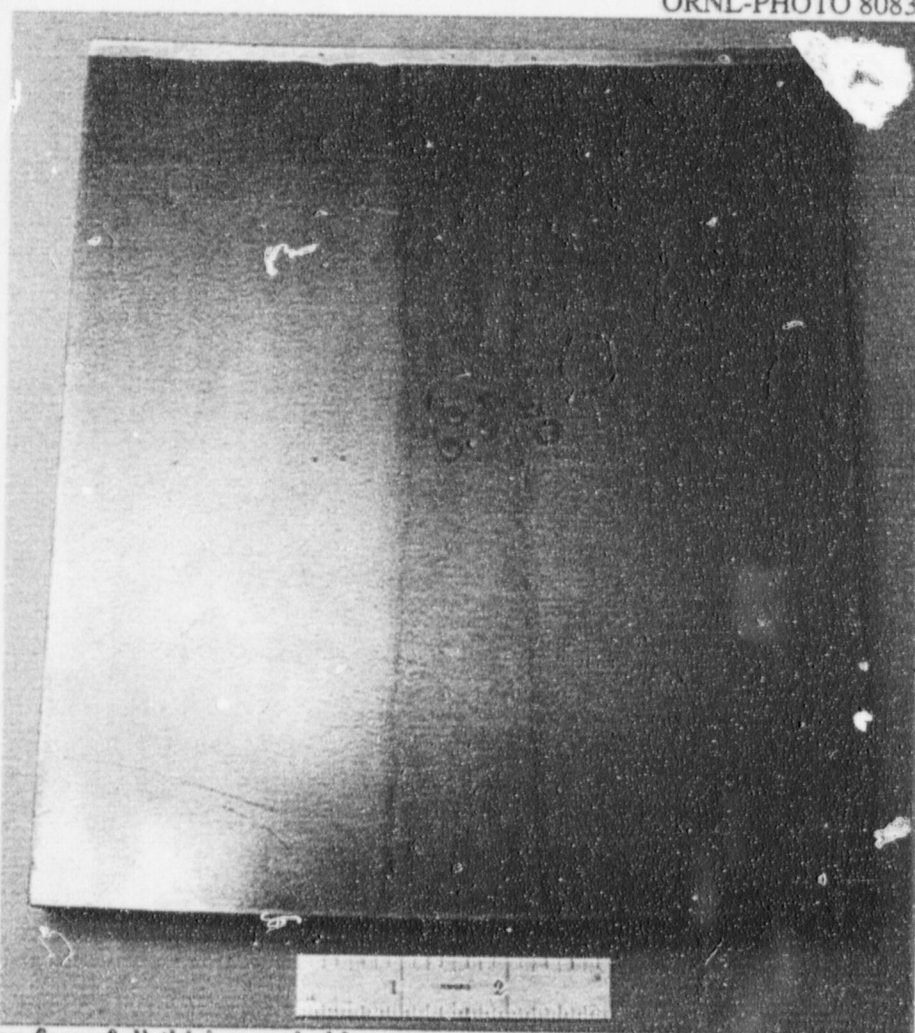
Coupon from full-thickness clad beam material showing metallurgical details of test weld
